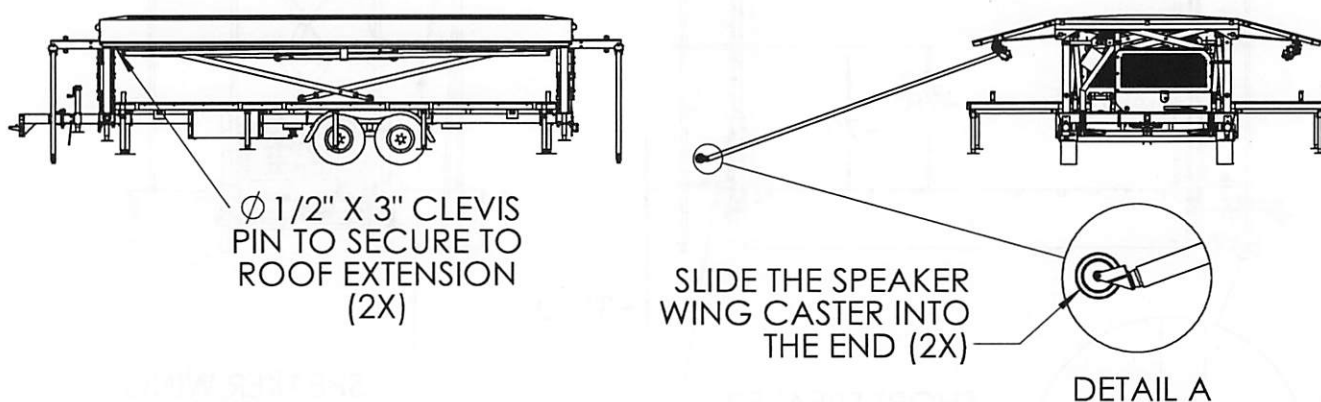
Right or Left Speaker Hanger Assembly Installation
